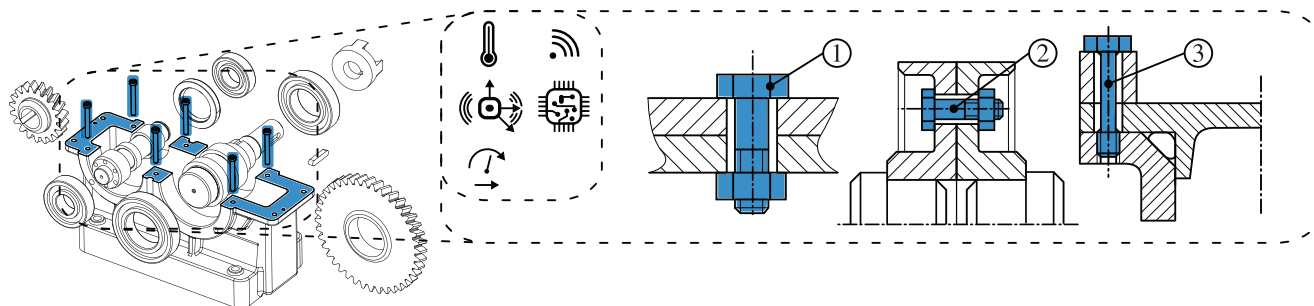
Sensor-integrating gear box, focusing on sensor-integrating screws and their measuring task exemplified by a single-bolted joint (1), a bolted flange (2) and a reduced-shank bolt (3).
